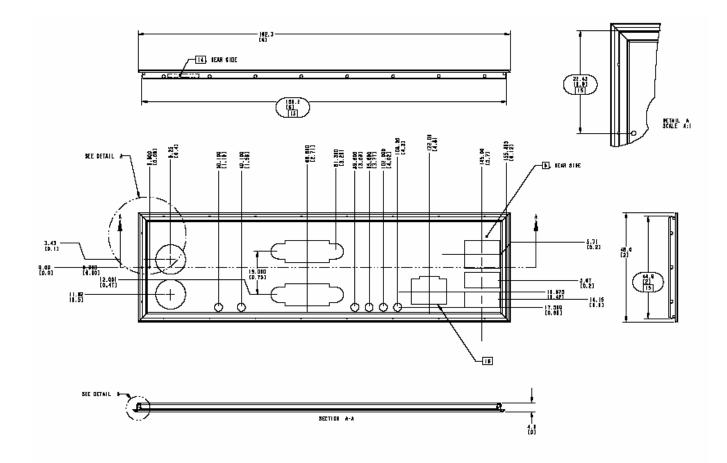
Pedestal Mount I/O Shield Mechanical Drawing for Intel<sup>®</sup> Server Boards S3200SH-L / S3210SH-LX
